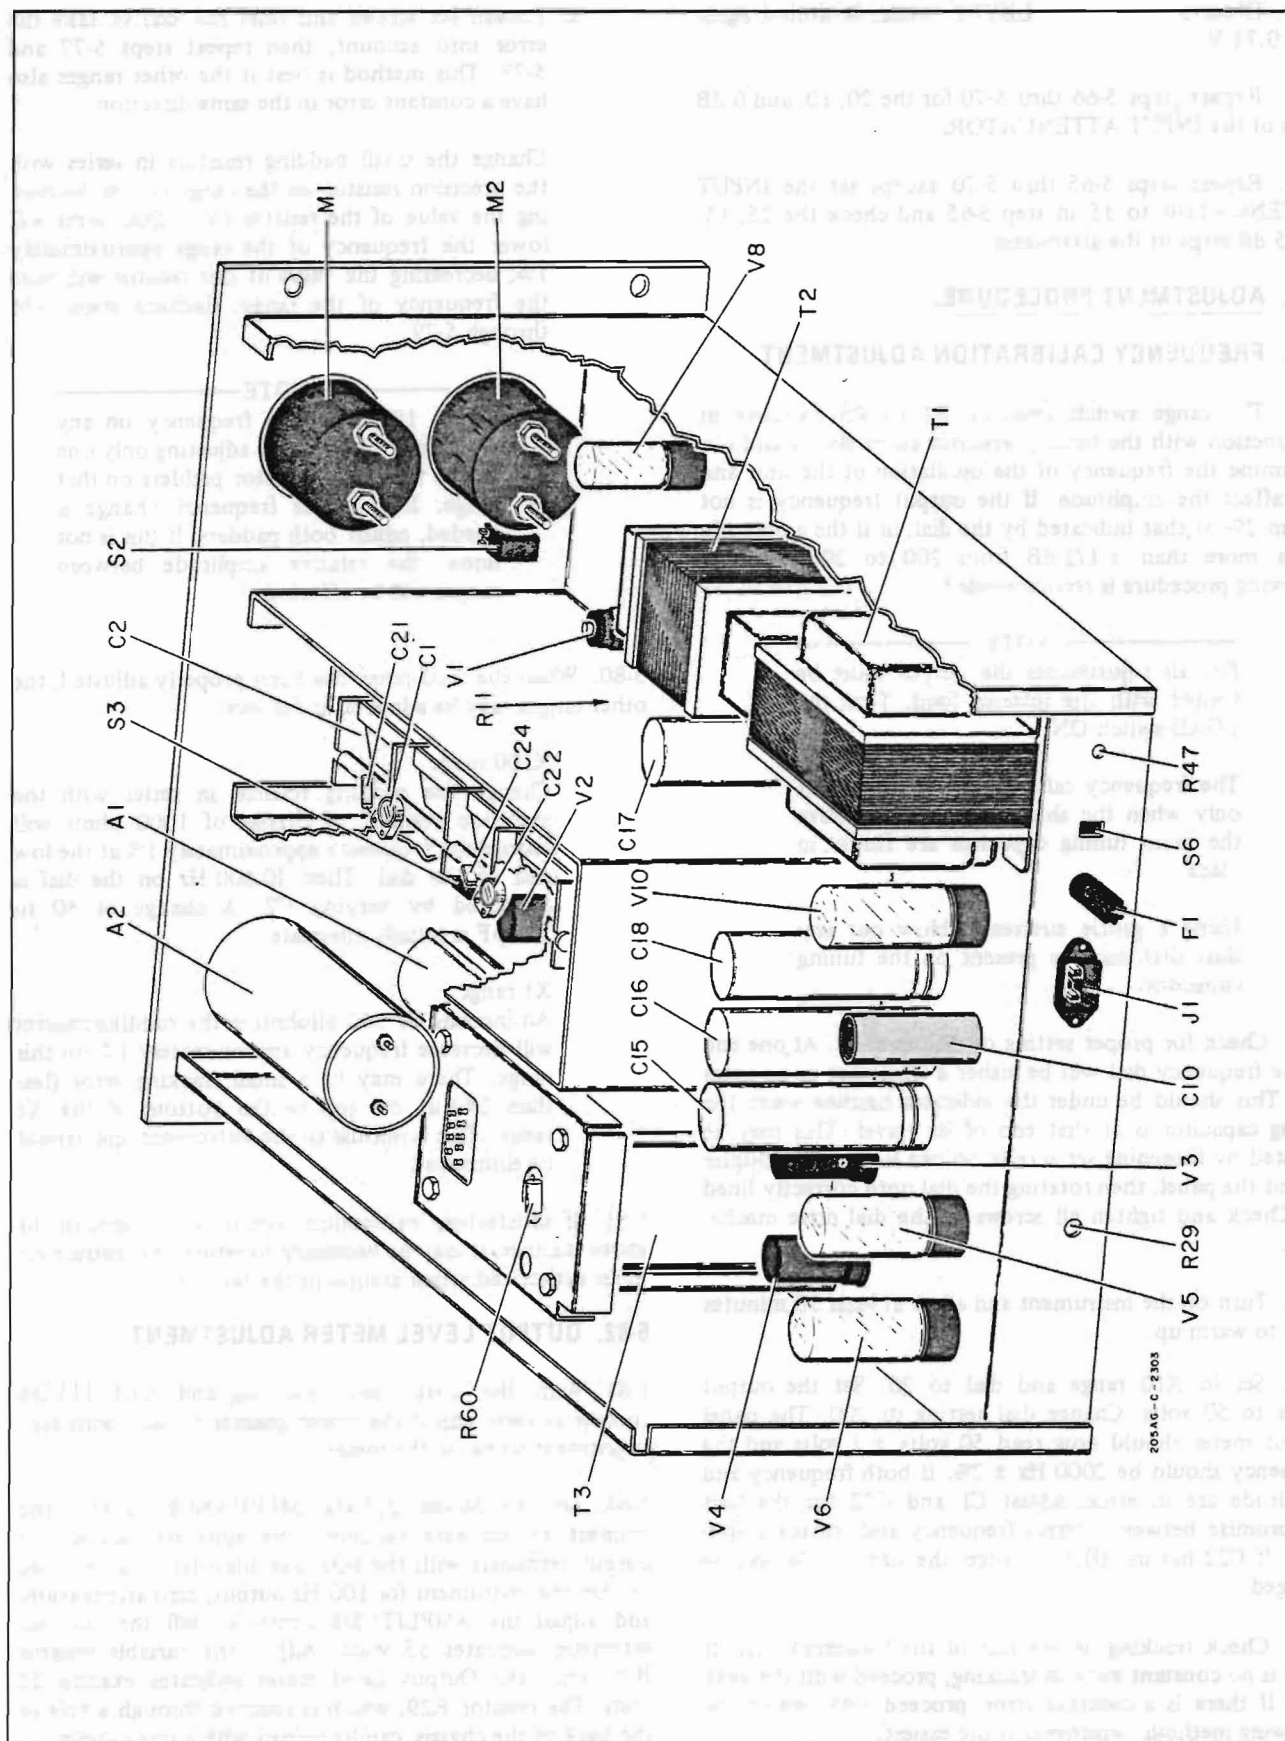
Adjustments and Chassis Component Location (Top View)
